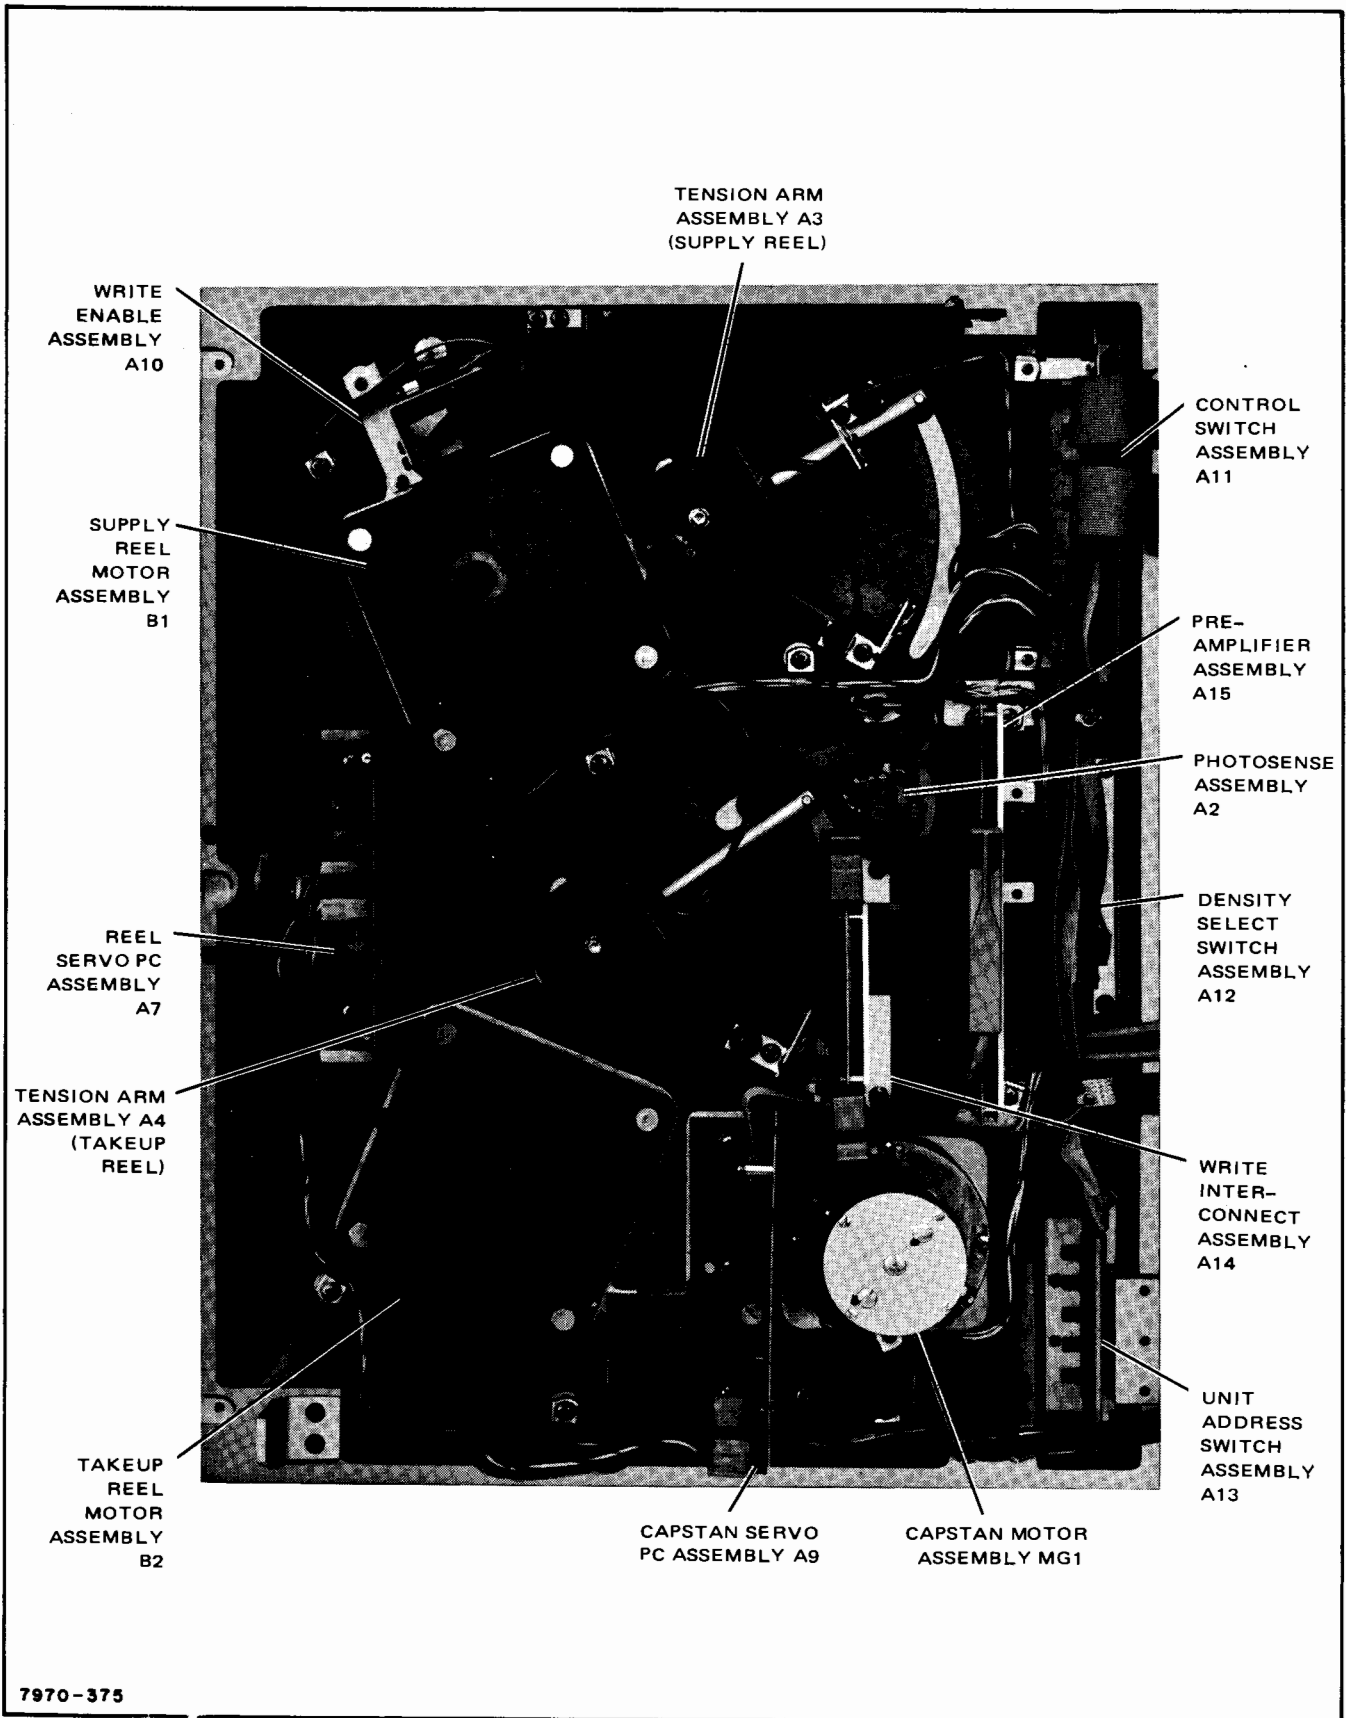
Tape Unit Assemblies, Main Casting (Rear View)
